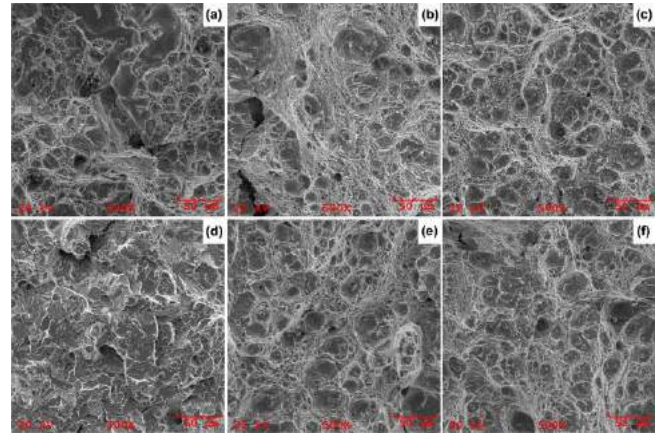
Fracture surfaces of a) A1 b) A2, c) A3, d) B1, e) B2, f) B3
